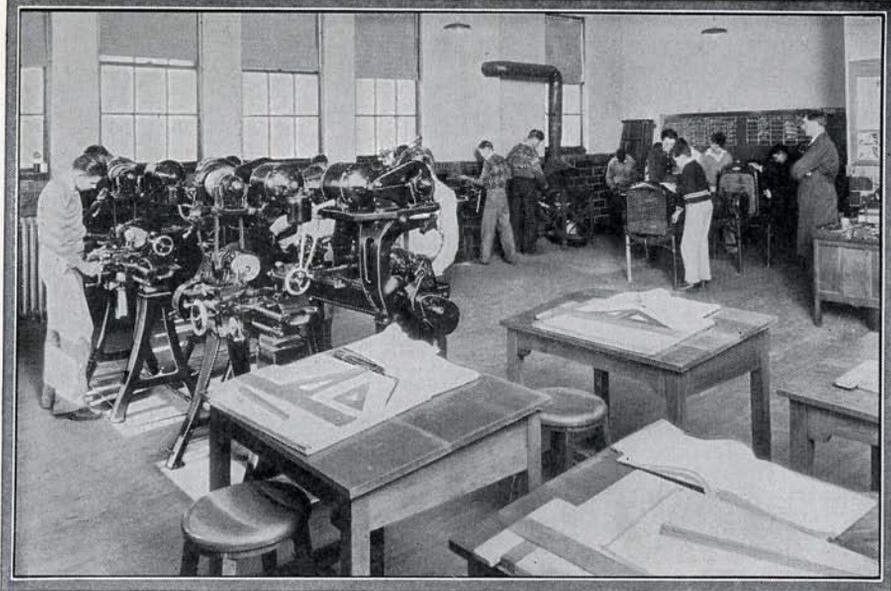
Large General Shop Showing Machine Work, Drafting, Forging and Auto Mechanics
